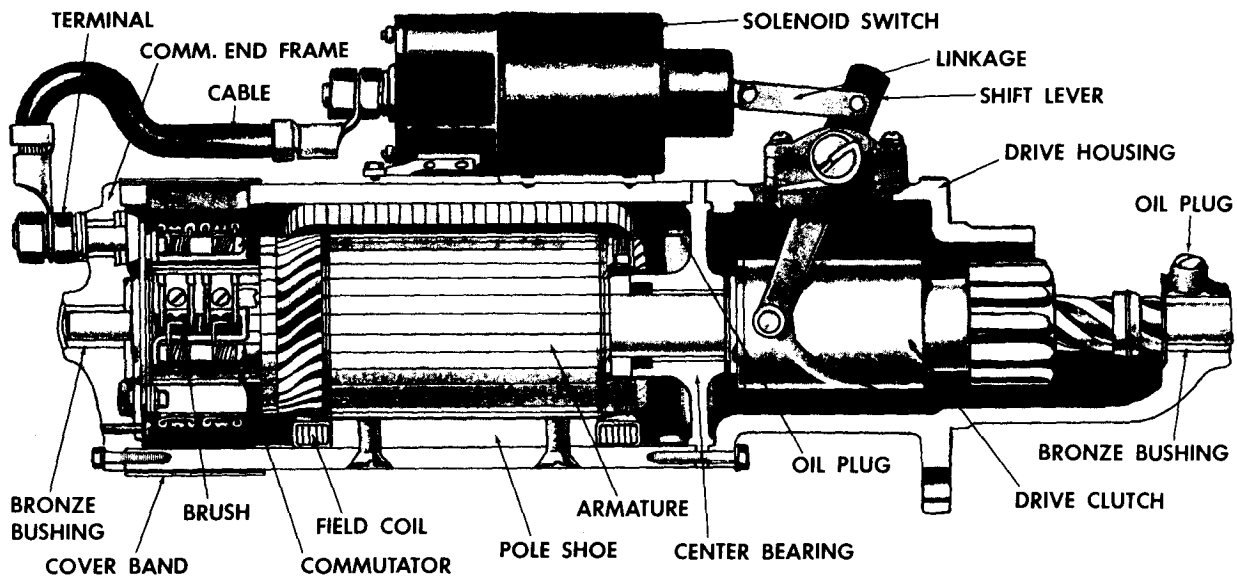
Dyer drive cranking motor with solenoid-operated shift lever.
